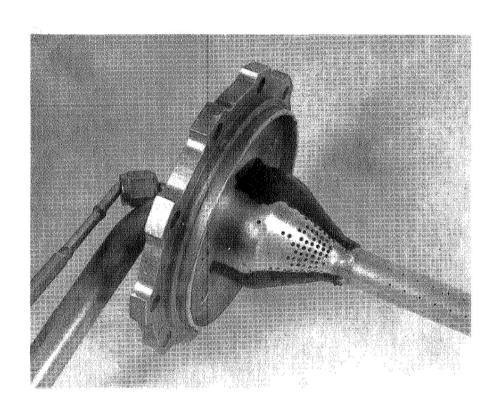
DIFFUSER ASSEMBLY: FLANGE END CONE - SHOWS TYPICAL SEALING OF HOLES TO CHANGE FLOW PATTERN
